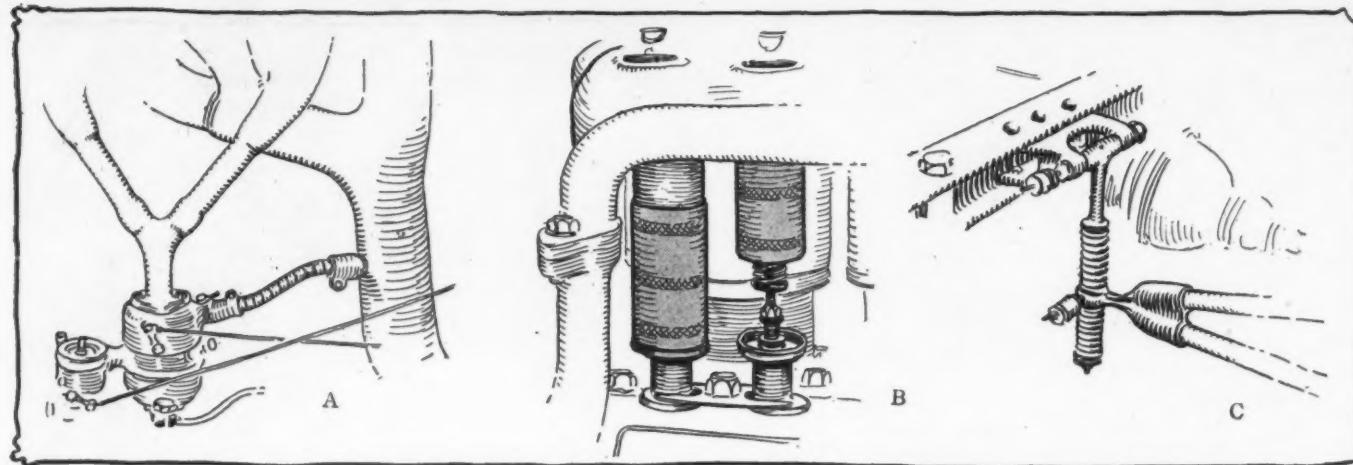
A, Buick hot-air carburetor jacket; B, Cadillac valve action covers; C, Cadillac torque connection
